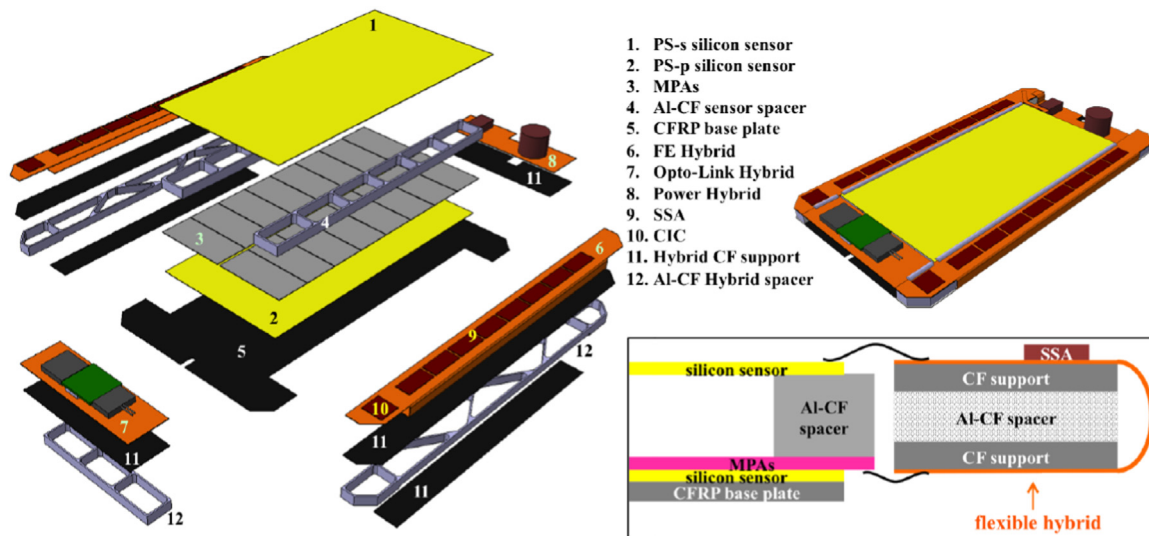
Exploded view of the PS-module and cross section through the module from technical proposal [2].
